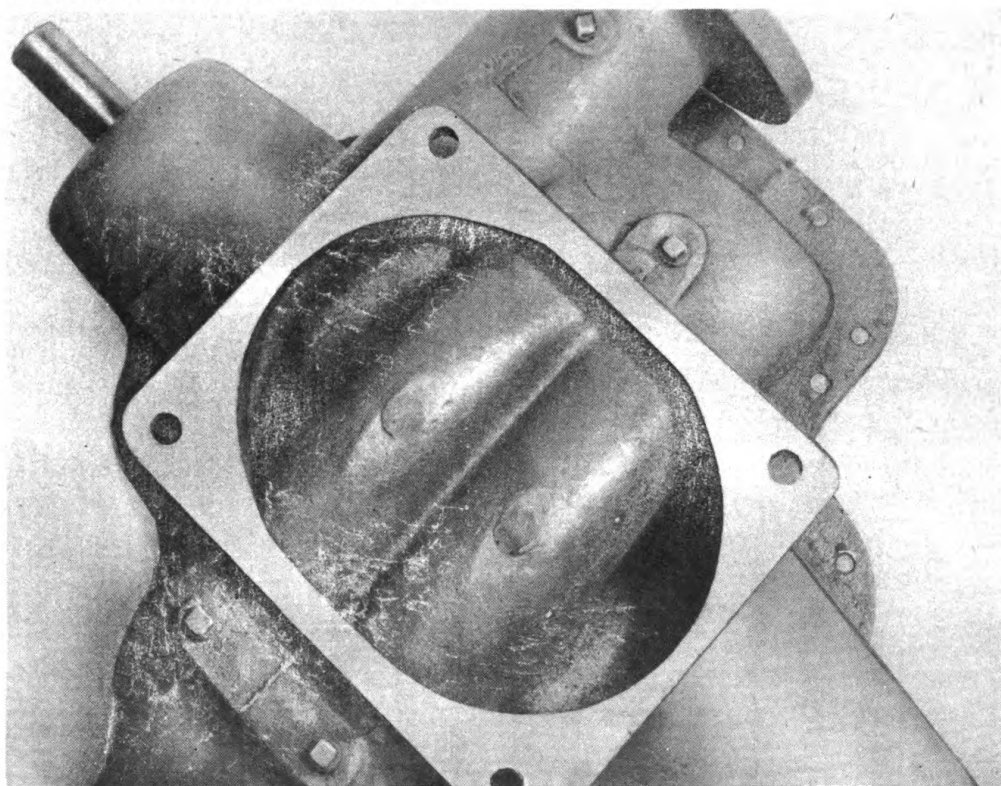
Bottom View of Pump Showing 4 Drain Plugs
